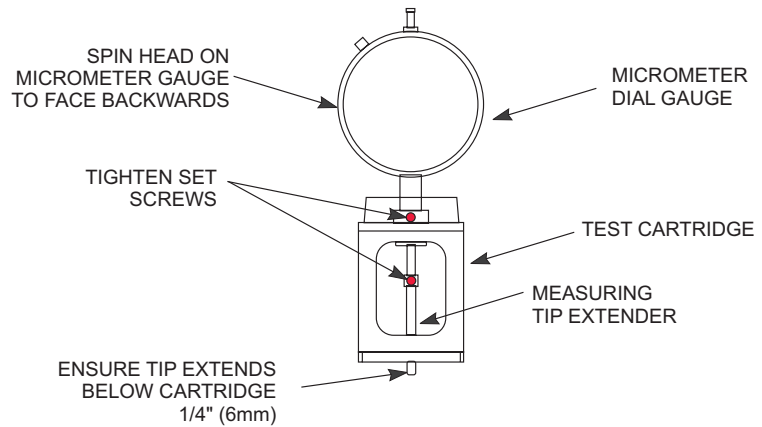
Setting Up Tools from Height Gauge Kit.
